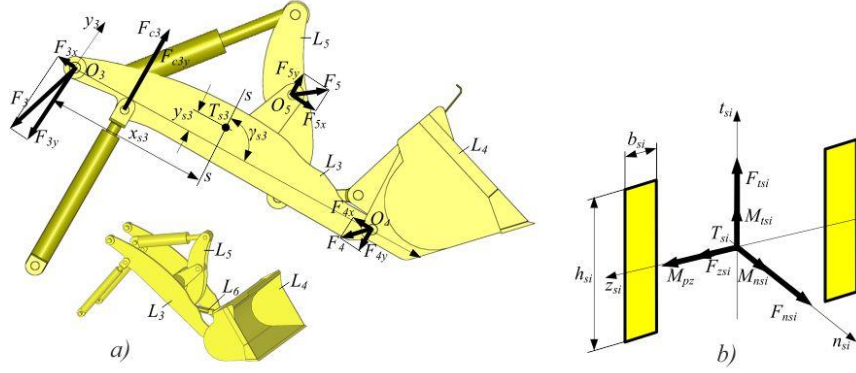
Loads on manipulator members: a) forces in the joints of manipulator mechanisms, b) loads on the cross-section of the manipulator
